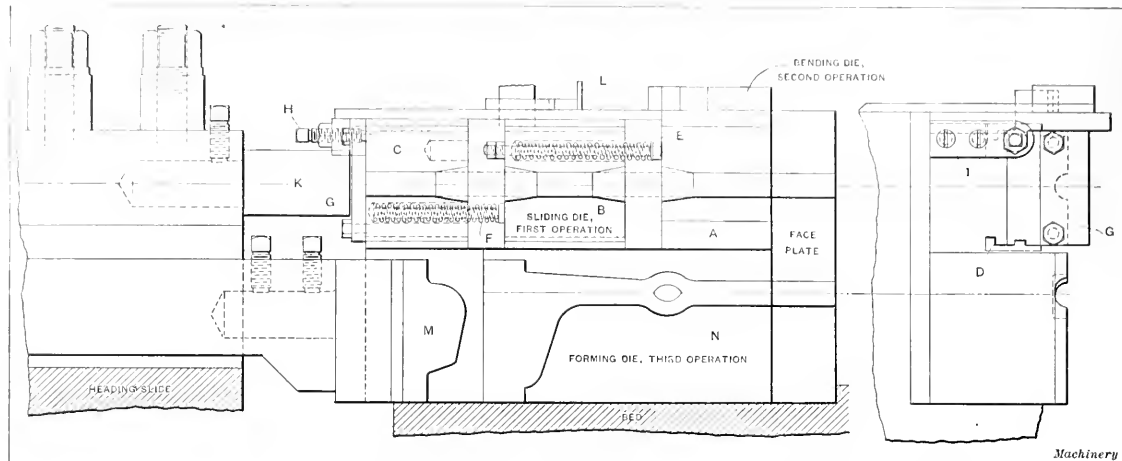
Construction of Dies and Tools used in the "National" Forging Machine for making Ford Front Axle
